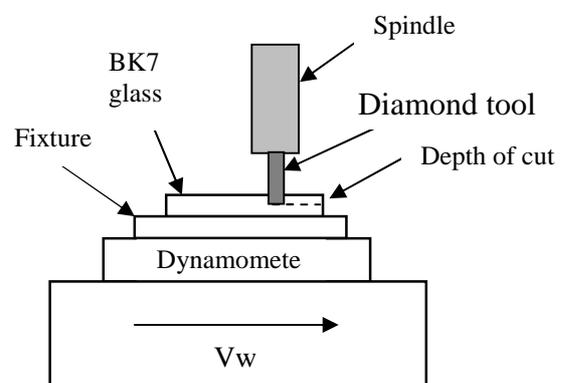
Geometry of the grinding kinematics for the bronze-bonded diamond composite tools.
